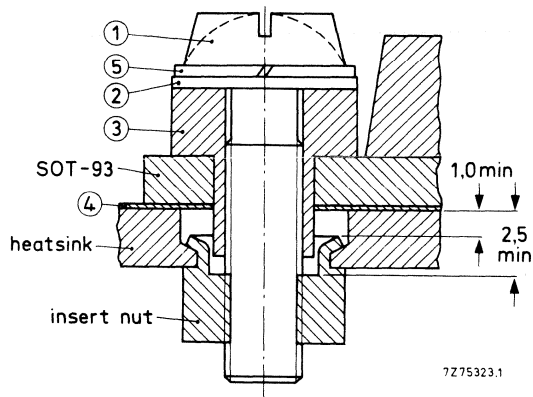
Assembly and heatsink requirements for 500 V insulation. See also Fig. 3.
